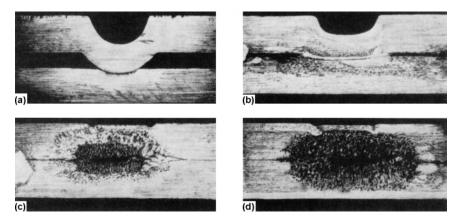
Relation of weld nuggets to embossed regions of metal sheets used in projection welding: (a) electrical circuit loop is completed when current travels through embossed projection contact points; (b) addition of pressure after welding current is turned off causes plastic deformation that flattens the projections. Source: Ref 3.4
